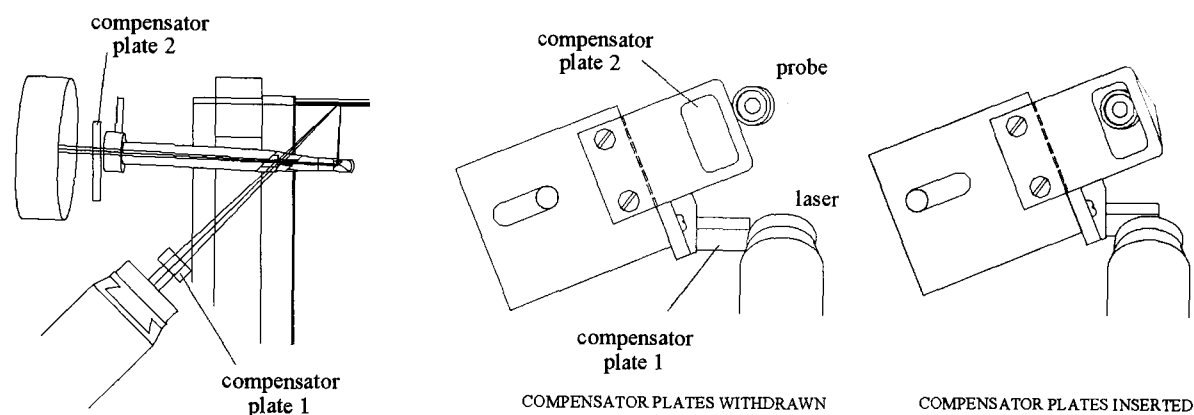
Compensator Assembly – Lower Meniscus Monitor
